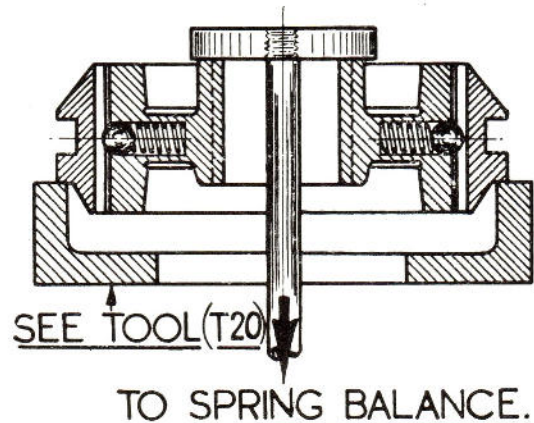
Testing "Top and Third" synchro sleeve axial load.
